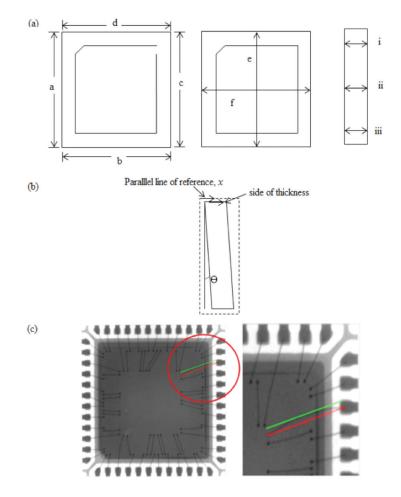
Measurement methods (a) Top view and side view dimension, (b) warpage and (c) wire sweep
